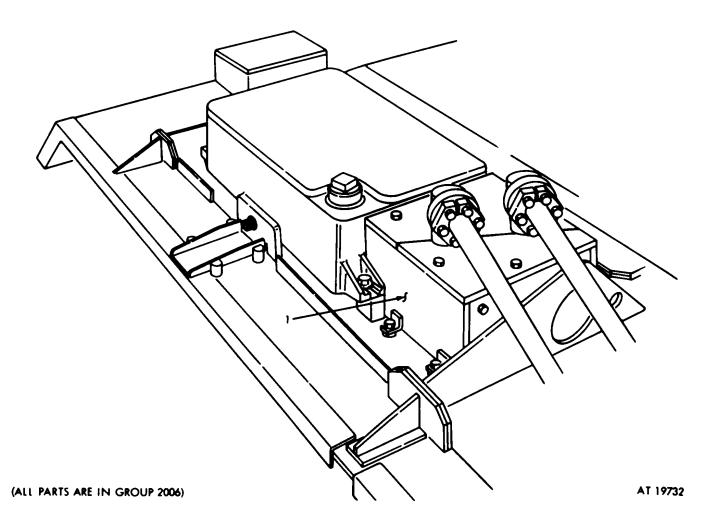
Hydraulic system armor guards (sheet 4 of 5)-partial exploded view.
